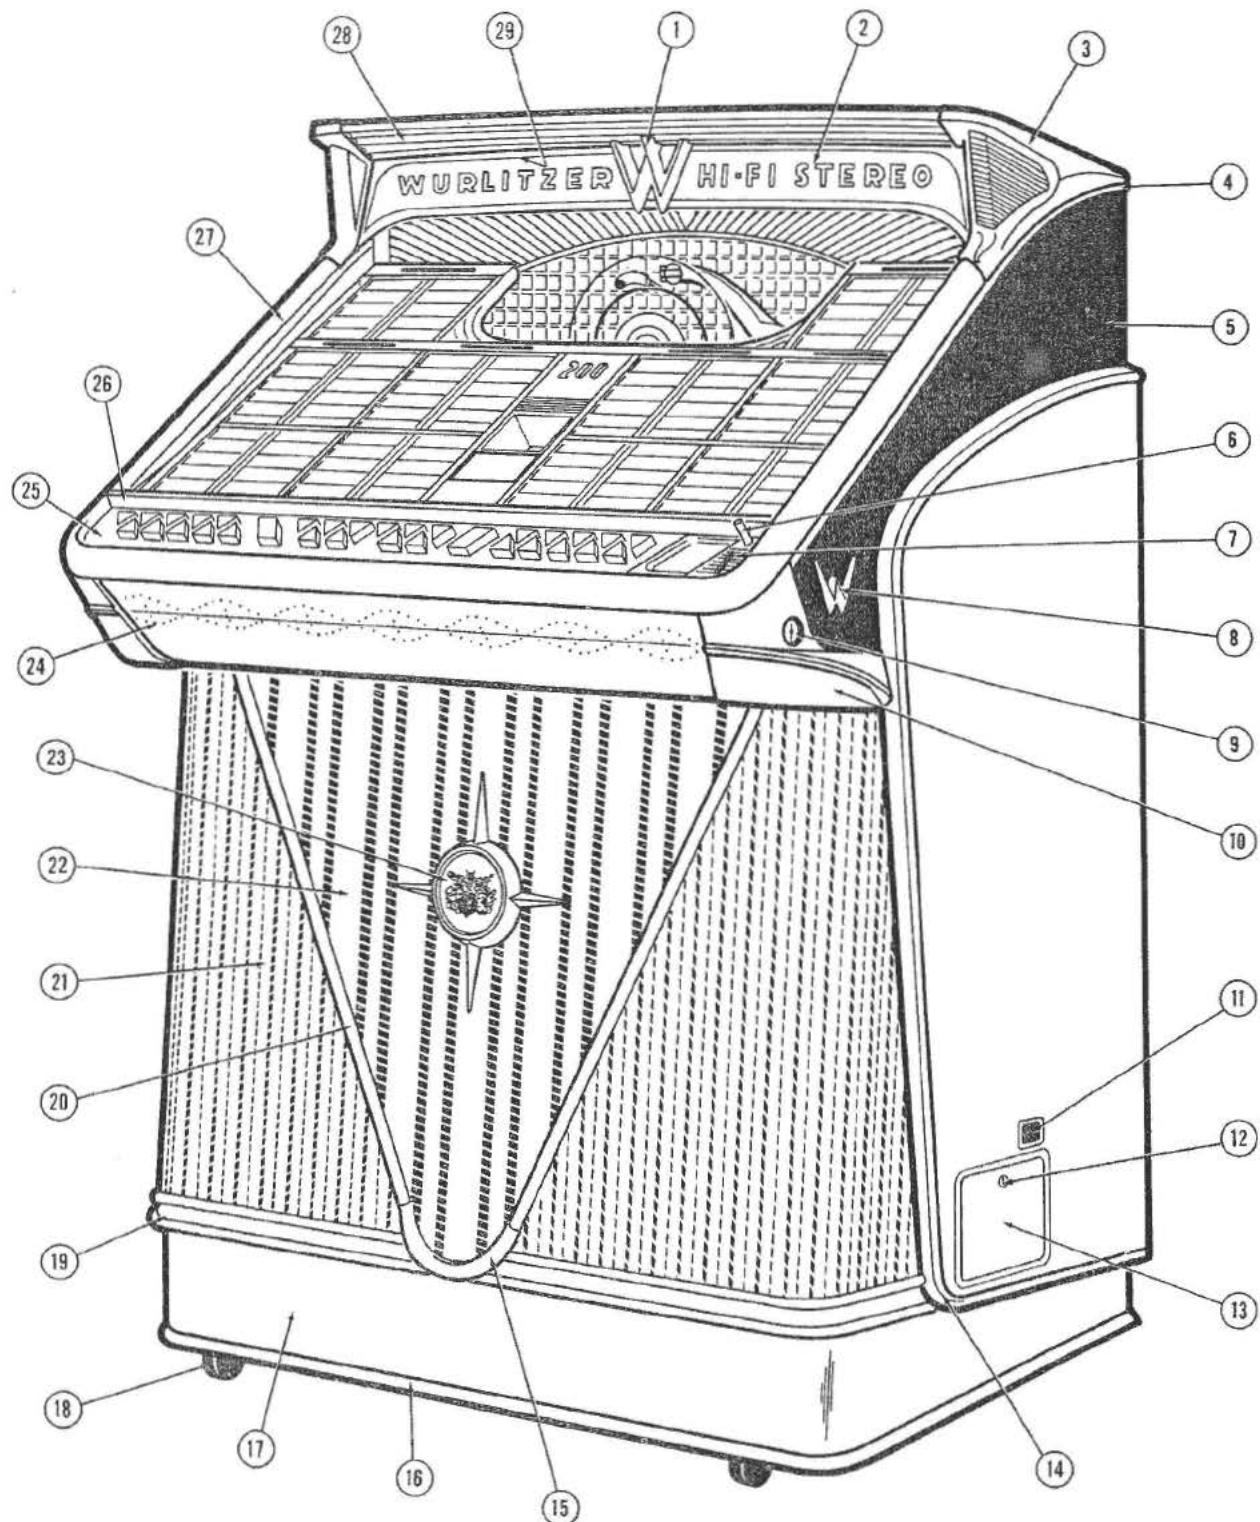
TRIM AND MOUNTING - FRONT VIEW.
